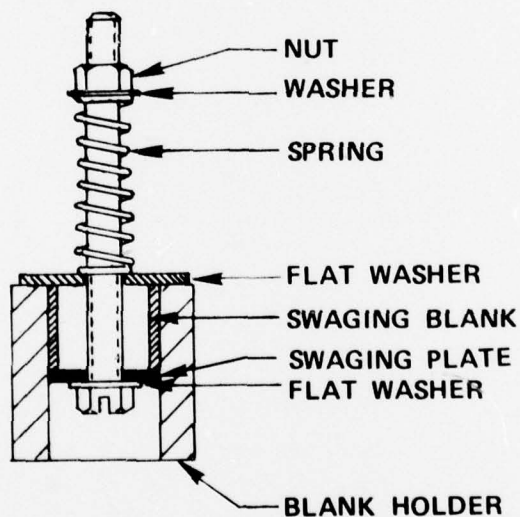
Cross-Section of Sleeve Seal Swaging Assembly Without Mandrel
